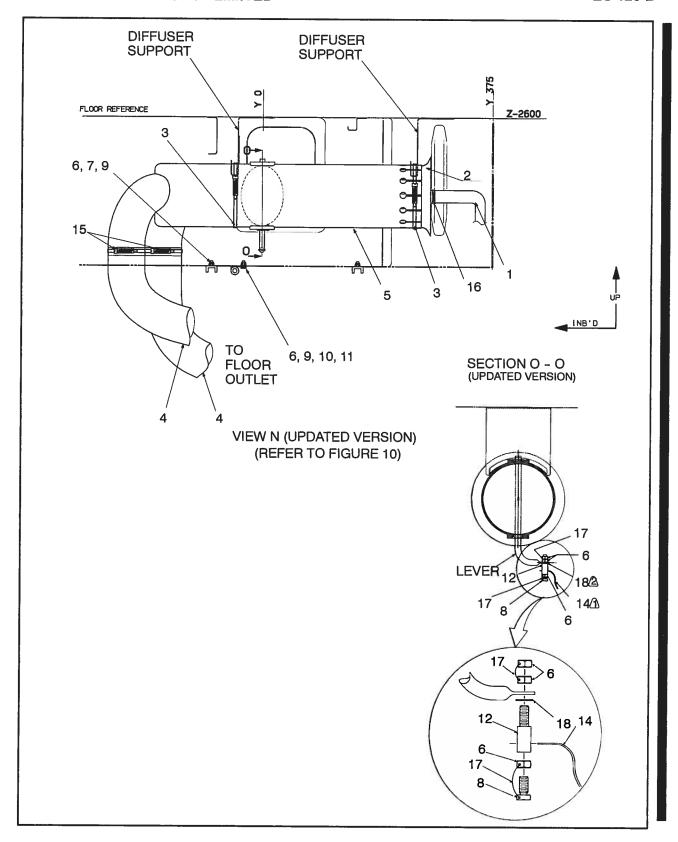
Heating Duct Assembly and Floor Outlet (Sheet 2 of 2)
